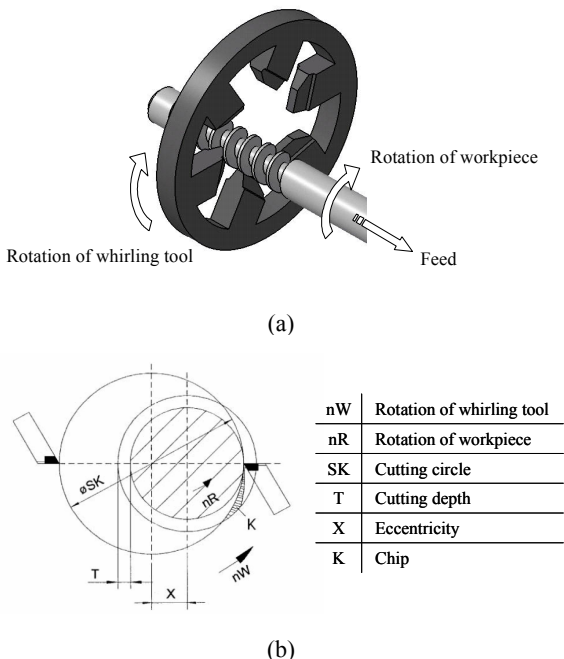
Whirling process ; (a) 3D-view, (b) cross-section view
